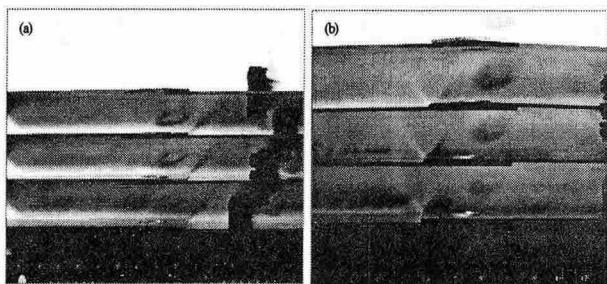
Photos of side view of spot friction welded 5J32 Al alloy with tool penetration depth and tool shape : (a) CTP and (b) CT
